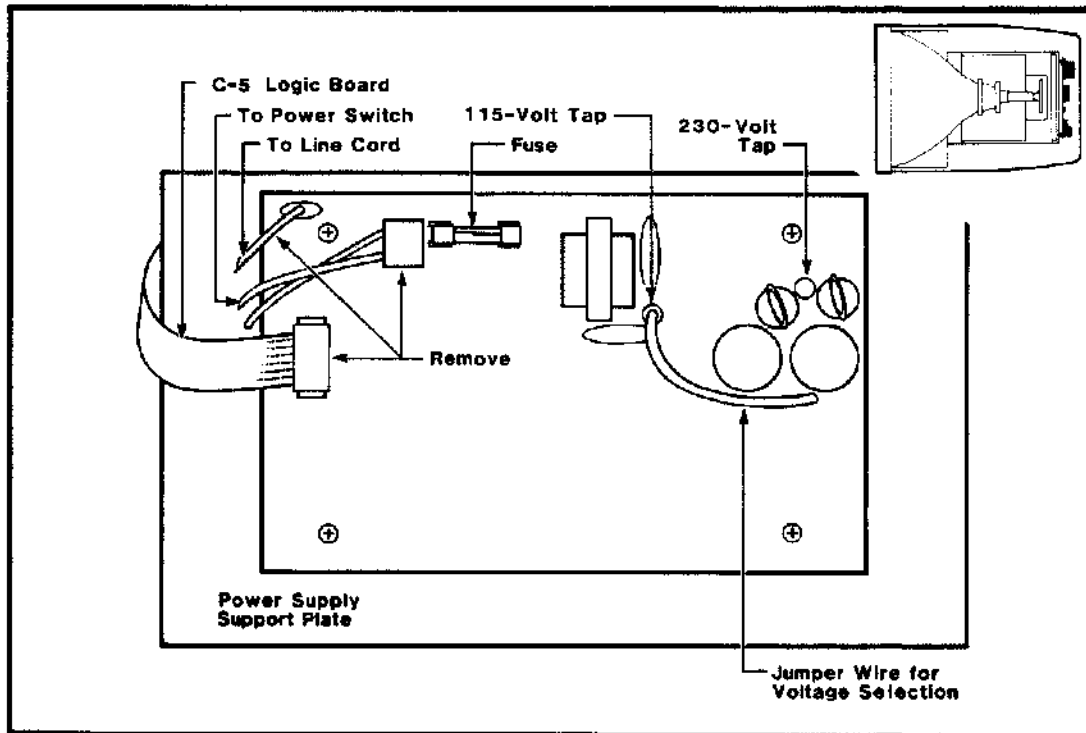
REMOVING THE C-5 POWER SUPPLY
